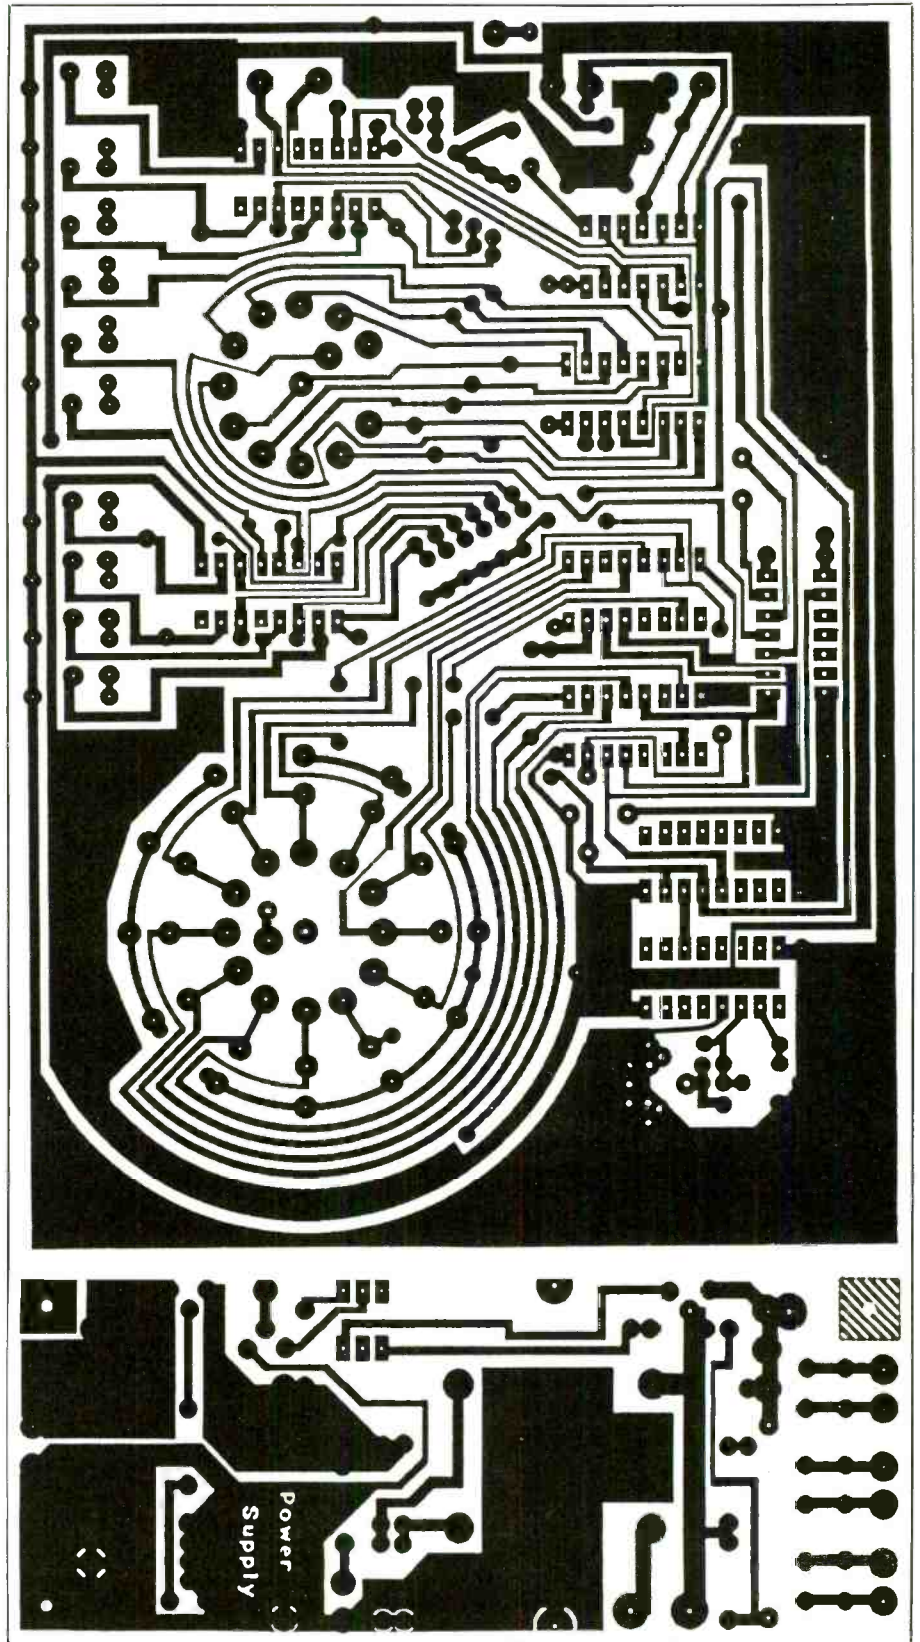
Actual-size etching and drilling guides for the counter and power-supply/controller printed-circuit boards.
